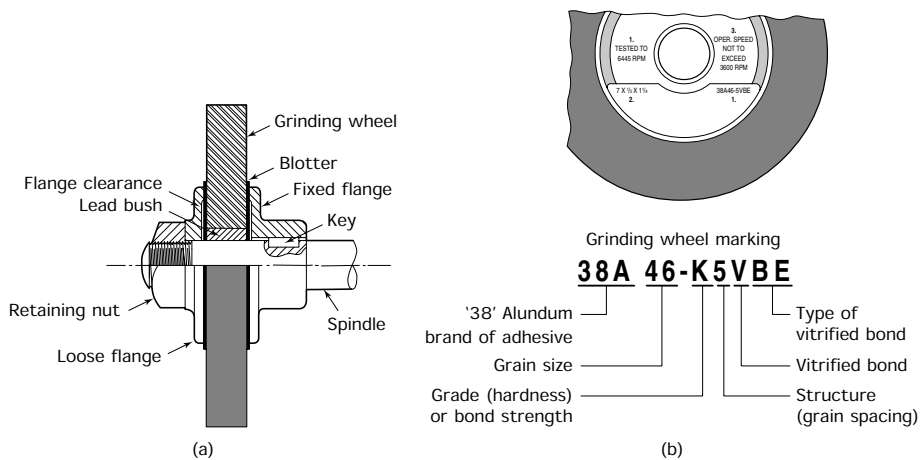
Mounting a grinding wheel (stage 1): (a) the wheel mounting; (b) checking the new wheel (reproduced courtesy of Norton Grinding Wheel Co.)
